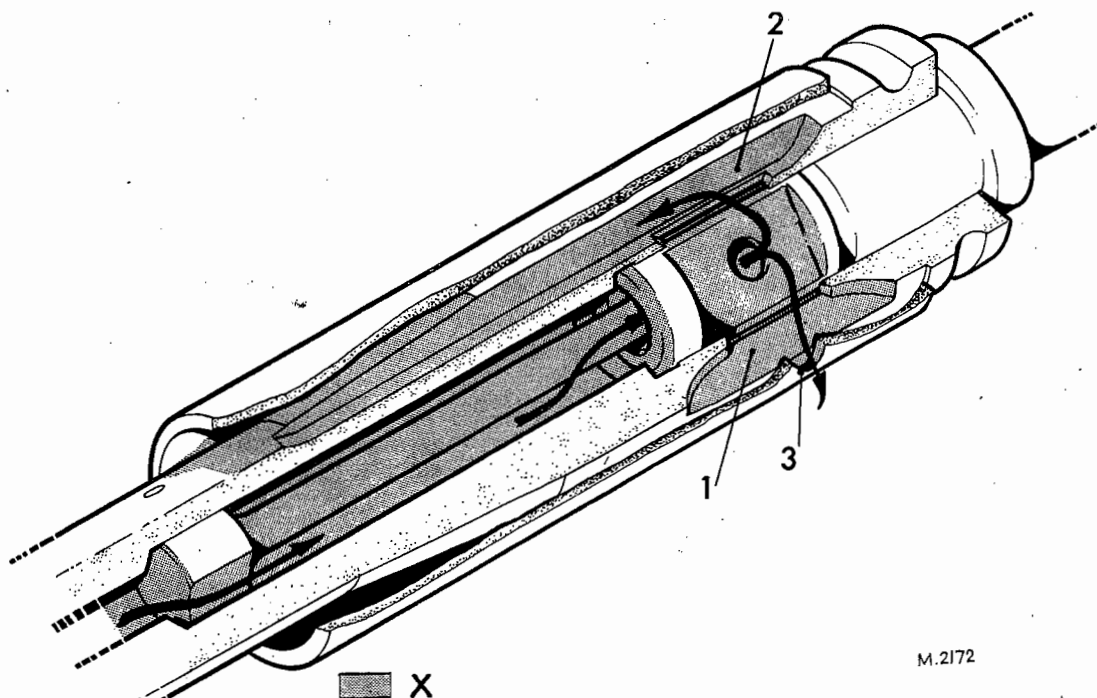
CUT-AWAY VIEW OF INNER COLUMN VALVE TORSION BAR ASSEMBLY, SHOWING FLUID CIRCUIT
